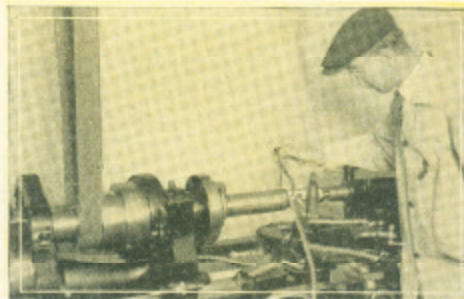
Taking a Heavy Roughing Cut on a Steel Shaft.
